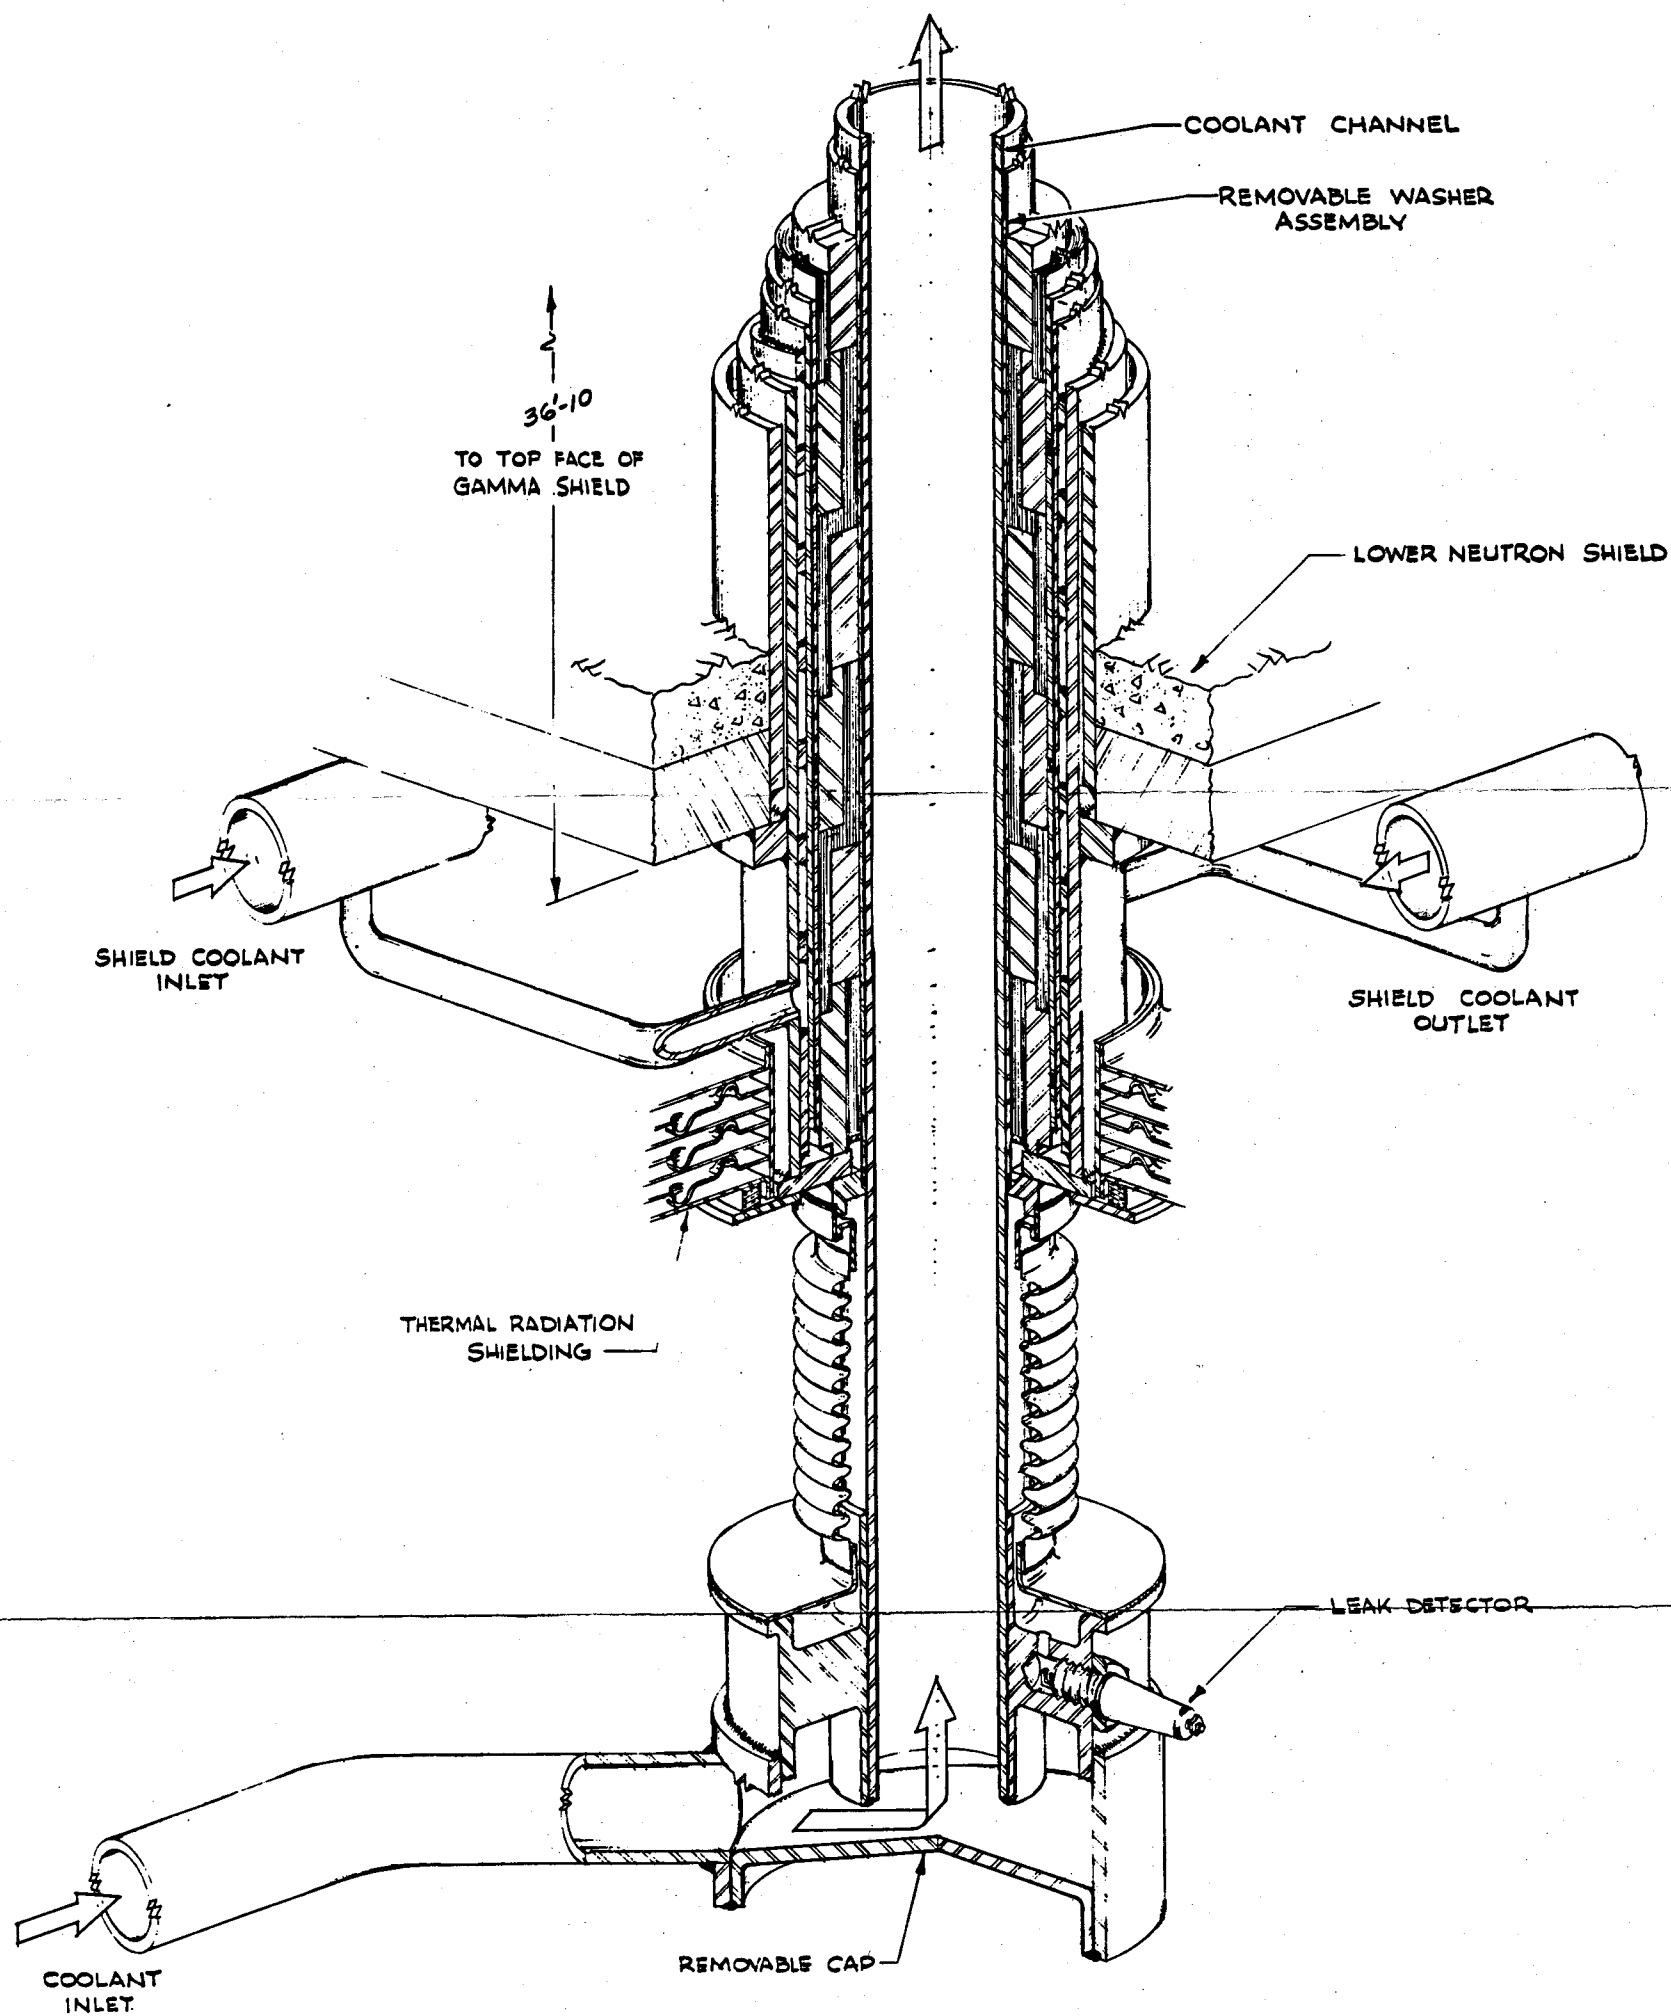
Coolant Channel Perspective Section thru Inlet Manifold
